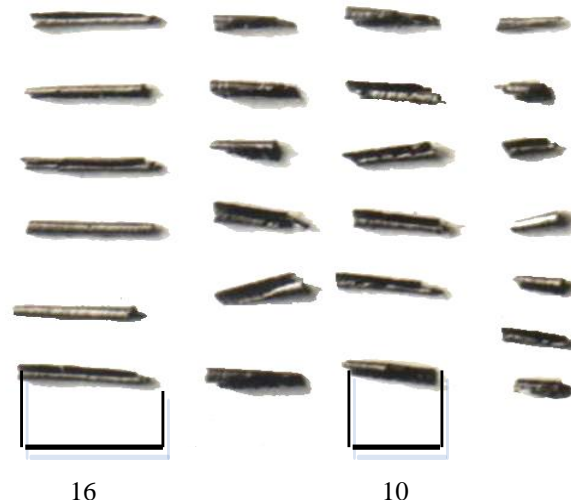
Chips cut by a hardmetal finishing cutter ($\tau=20$ mm)
